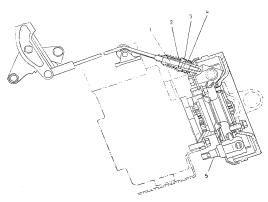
Hand Brake Linkage I — cable end, 2 — lock nut, 3 — nut, 4 — brake shoe expander rod, 5 — adjusting screw
